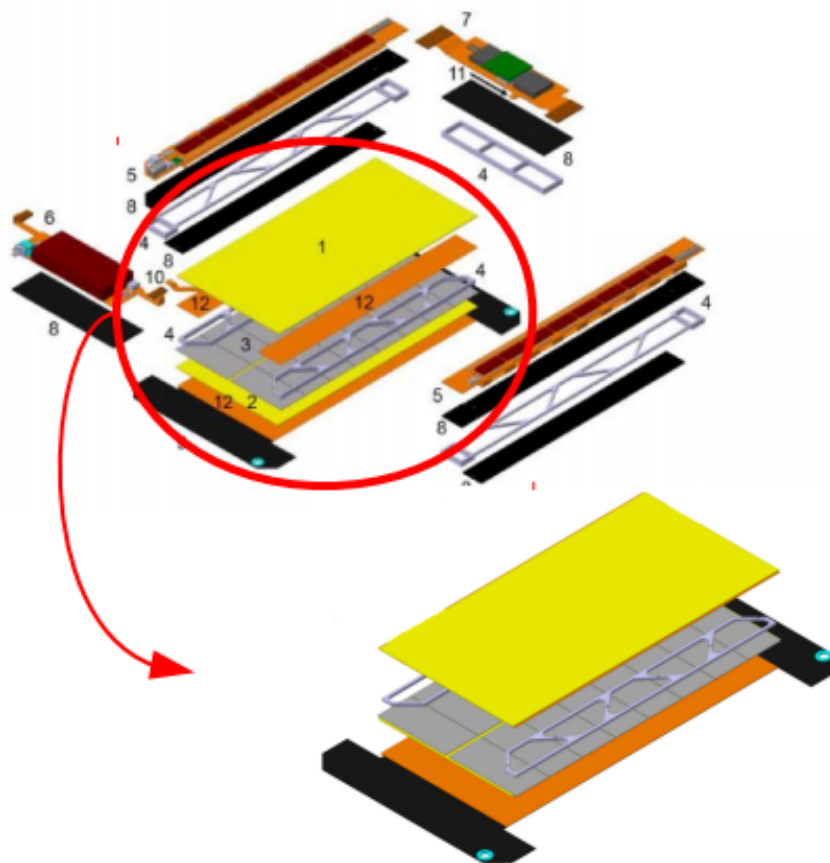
An exploded view of the PS Module design. The circle indicates the assembly used in the work described in this report: baseplate, kapton foil, 2 glasses (instead of silicon sensors) and 2 spacers [2].
